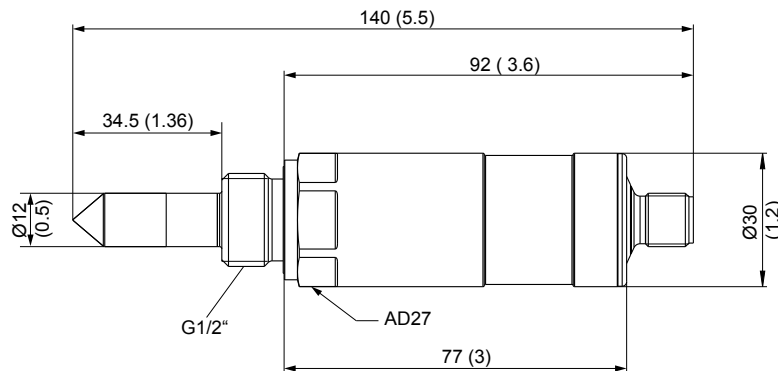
EE355 Dimensions G ISO Thread in mm (inch)
